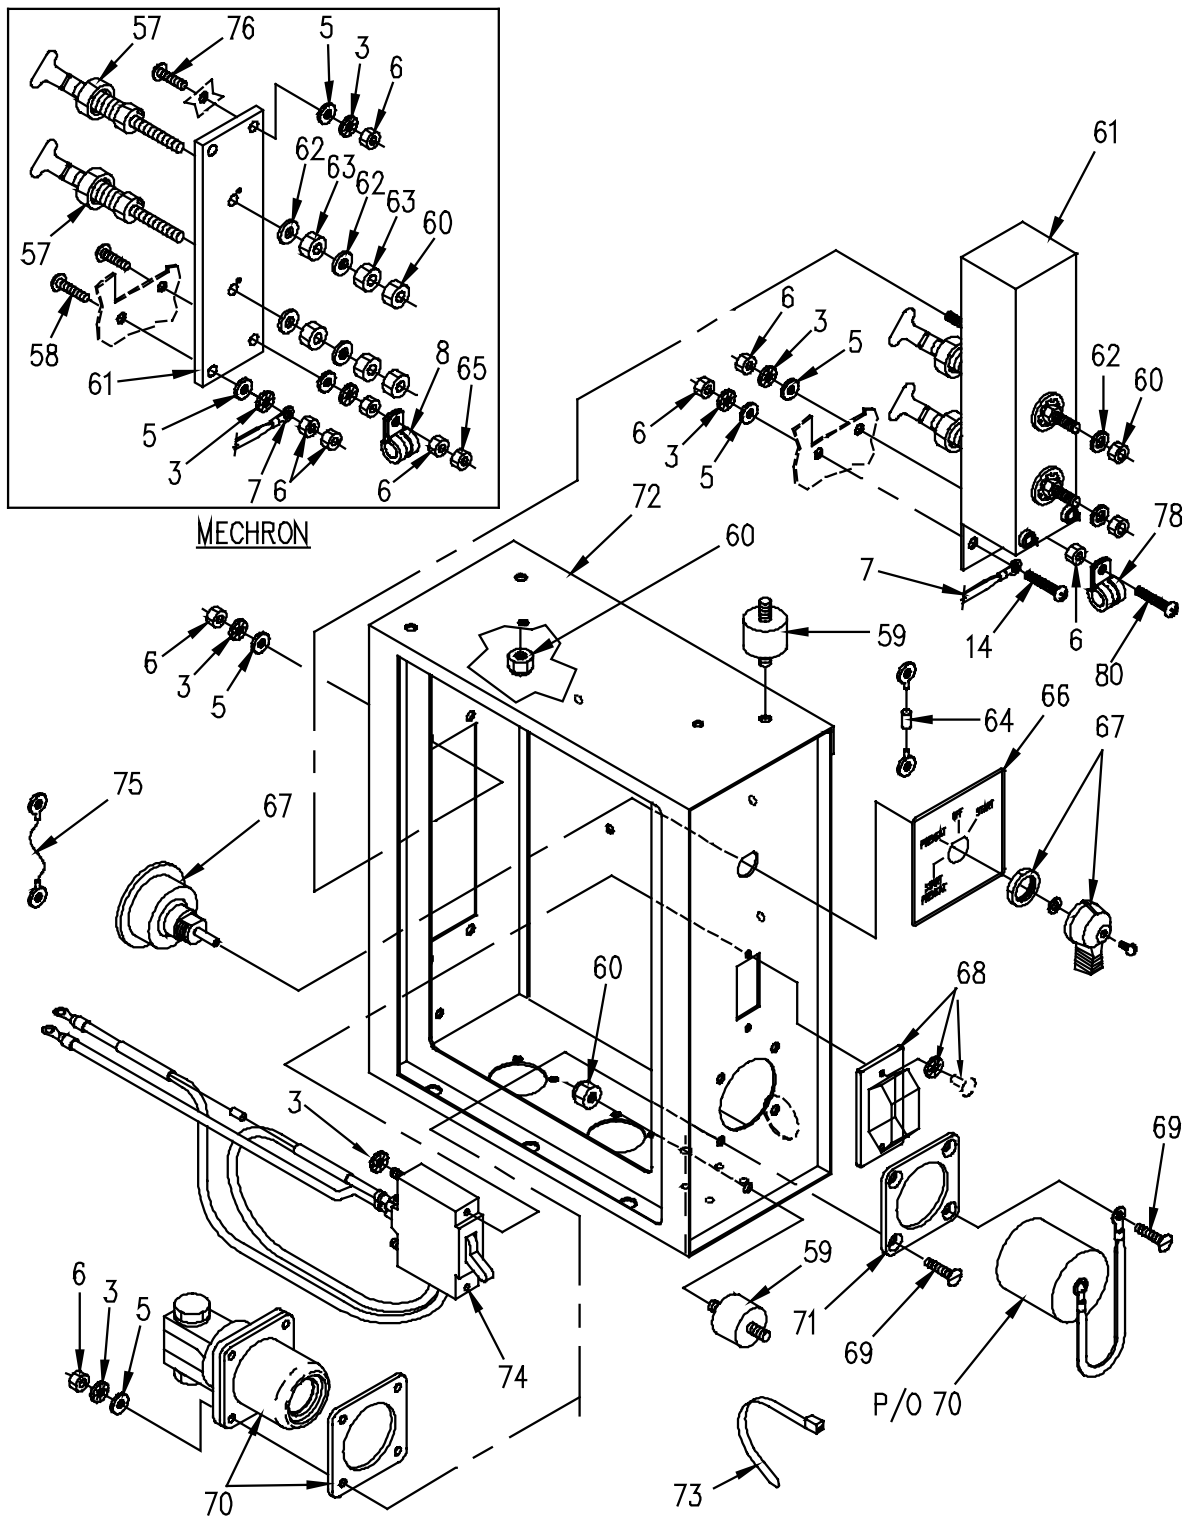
Control Panel Assembly (MEP-531A) (Sheet 3 of 3)
